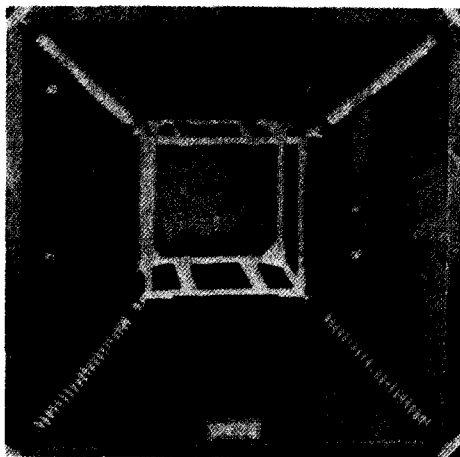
Three-Dimensional Protection Provided to Missile Component by Helical Springs With Stainless Steel Spring Cushions Inside the Springs Used for Damping (Spring rate is identical in all planes, assuring equal performance regardless of the attitude at the time of impact.)
